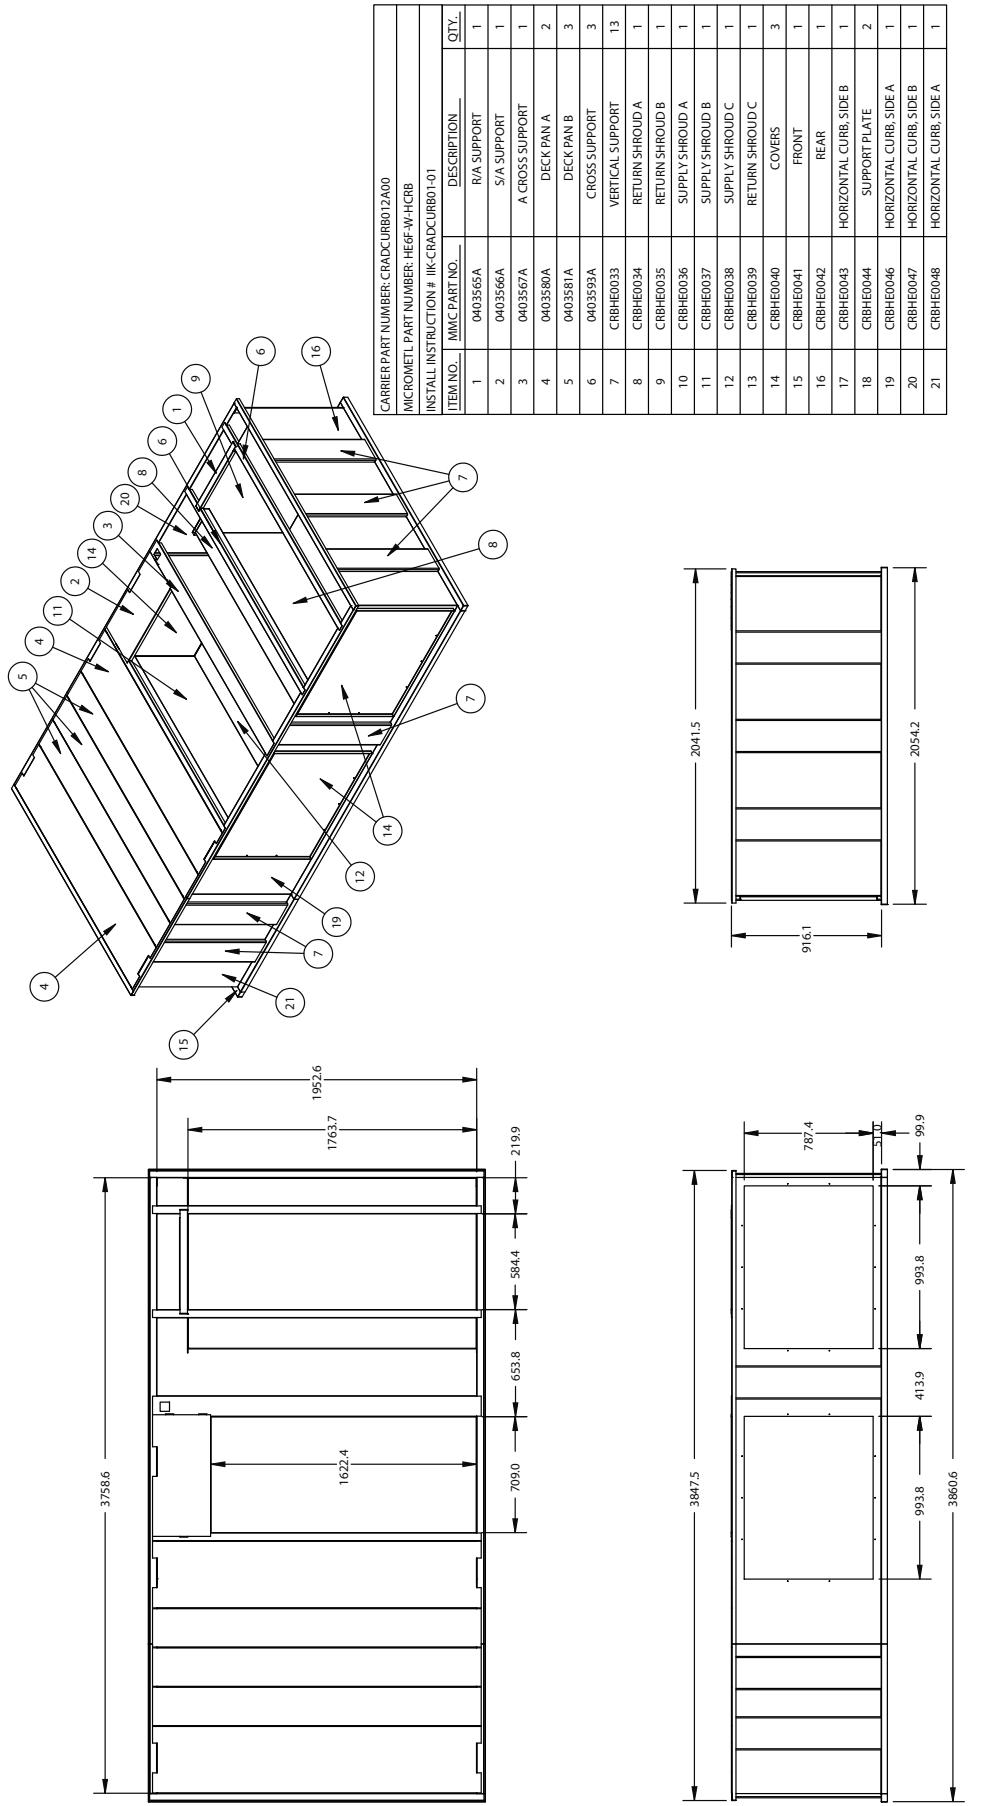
CRADCURB012A00 Horizontal Curb Adapter Assembly
